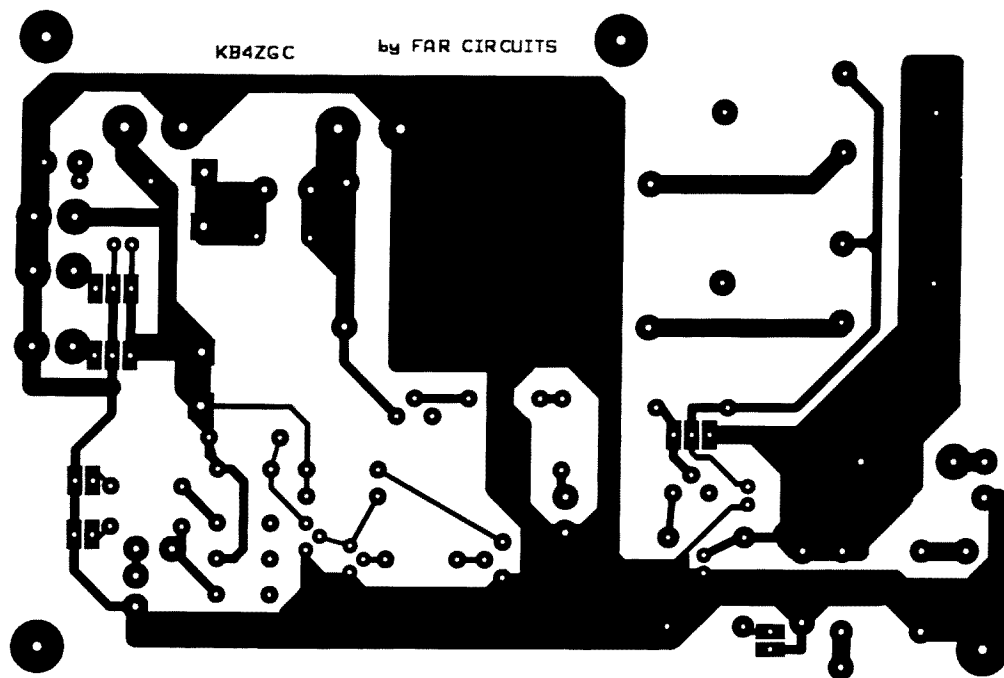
Circuit board and parts placement for the Backup Battery Monitor/Charger/Alarm. Note: If transistors Q1 and Q2 are mounted on the PC board, they must be heat-sinked. The transistors may be external to the board and wired back to the PC board.
